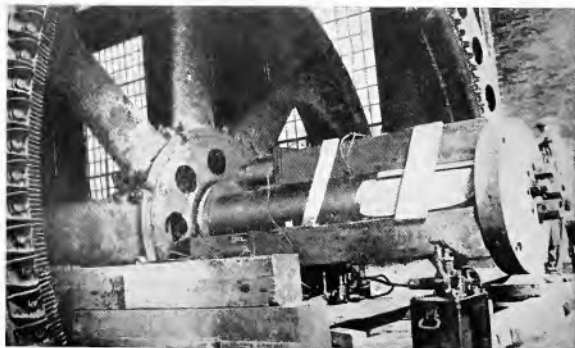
Arrangement of Parts for Shaft Pressing, employing three 150-ton jacks
